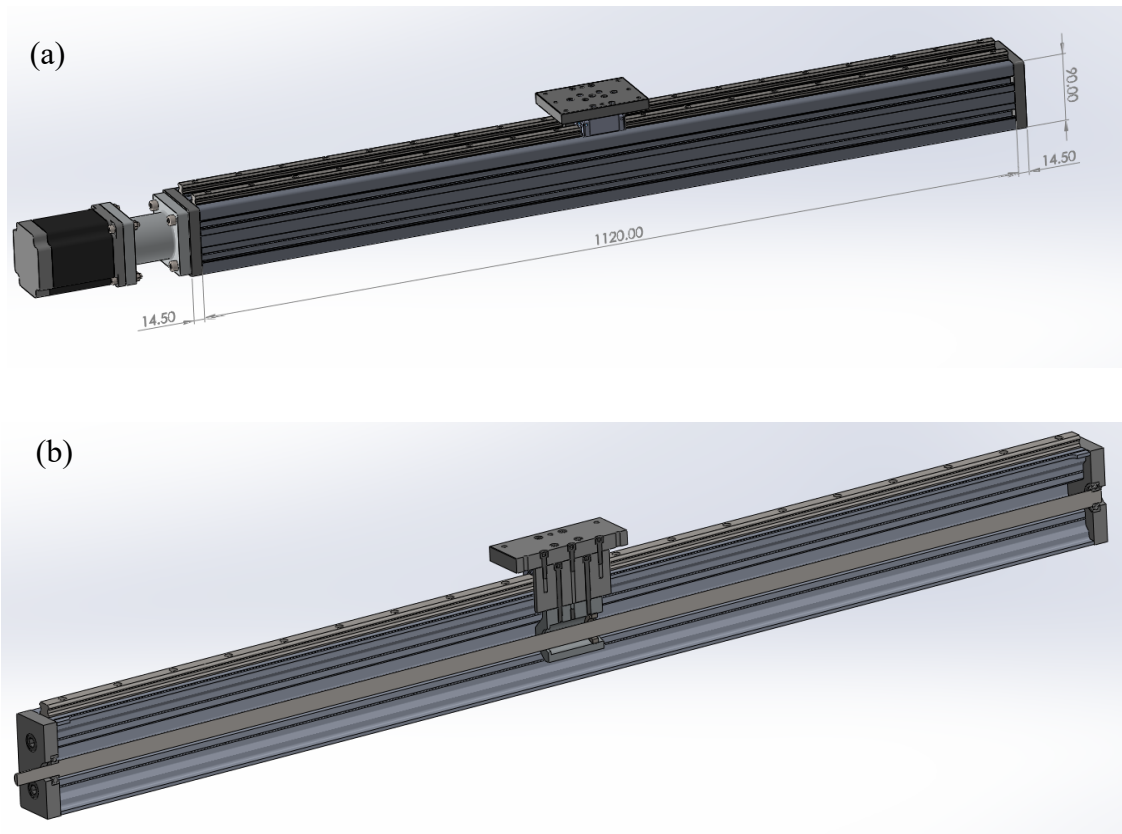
Traverse mechanism (a) Dimensions (b) Cross-section
